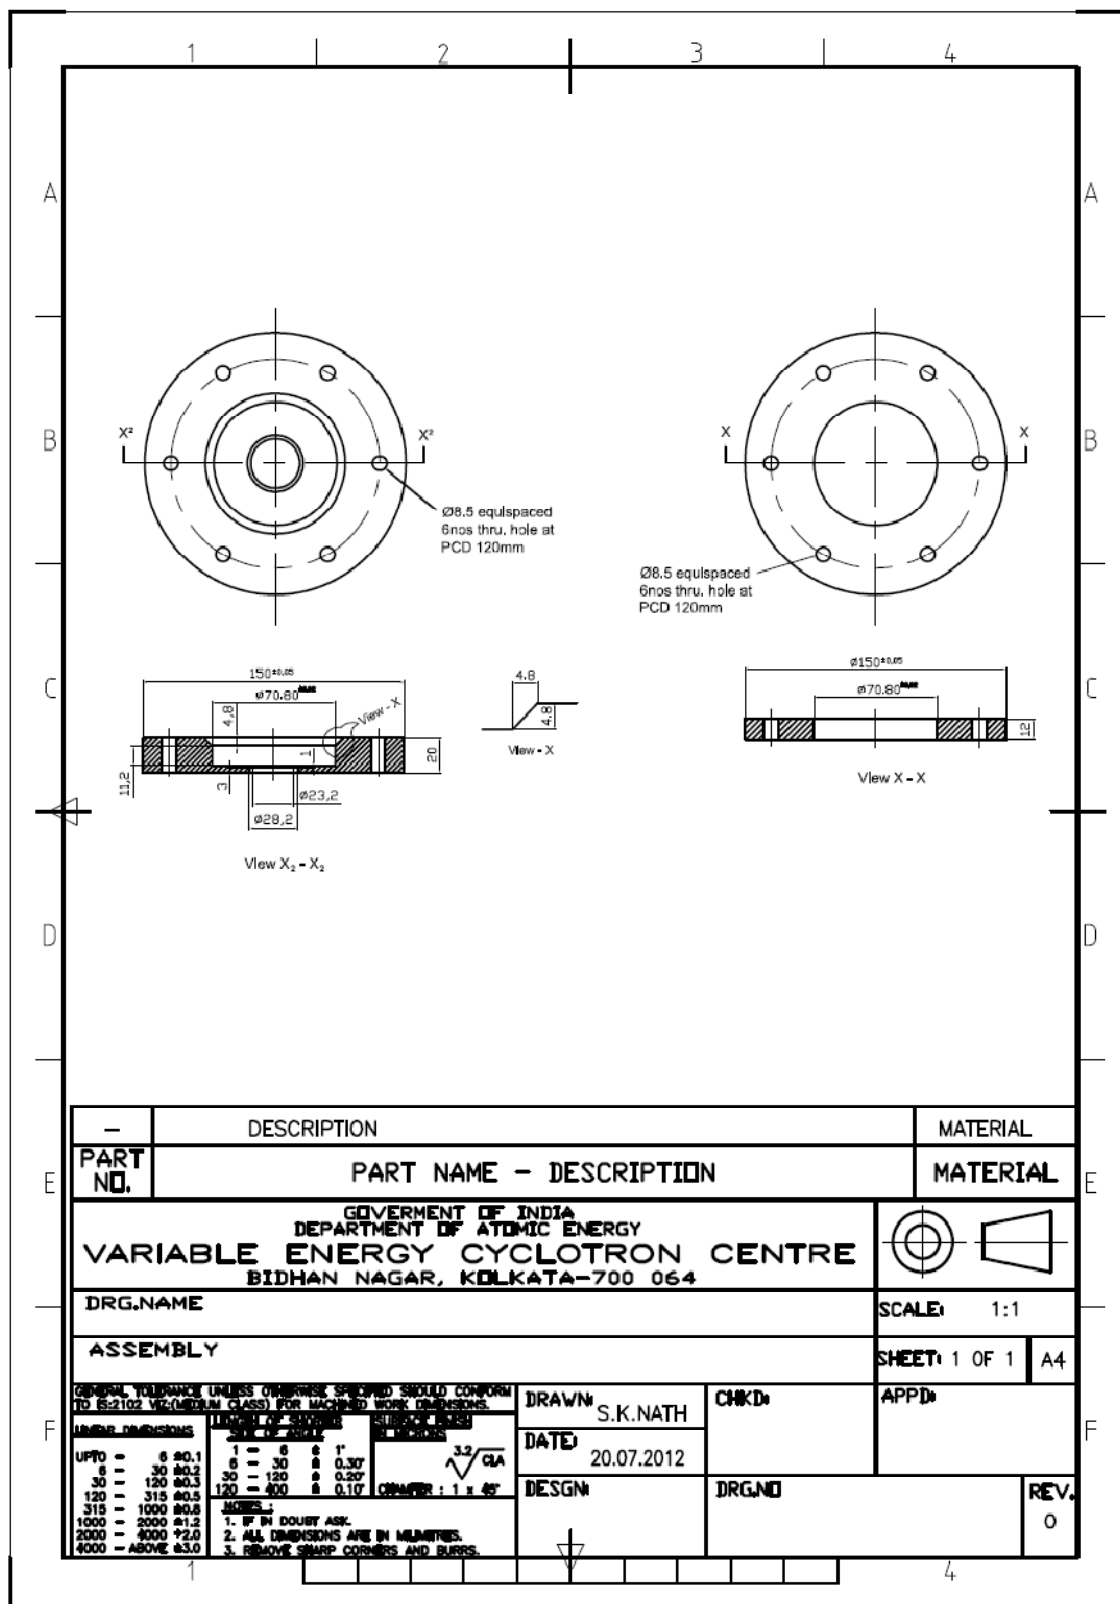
Picture of drg. For helium leak detection outside sealing arrangement
